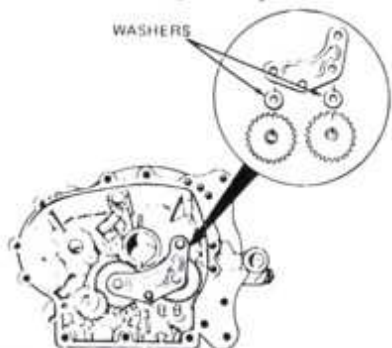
View showing Dyna-Static balancer gears installed in Model VM80 or VM100 engine base. Balancer gears are identically located in Model HH80 or HH100 crankcase cover. Note location of washers between gears retaining bracket.
